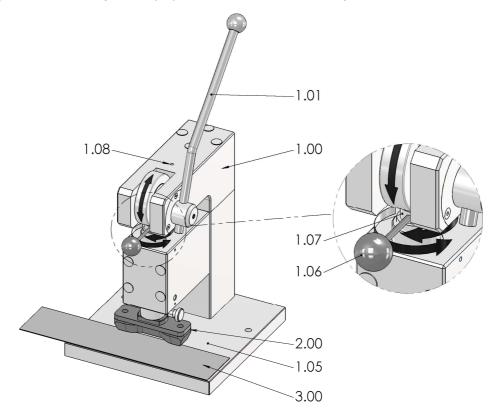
ADJUSTMENT OF CUTTING DISTANCE
